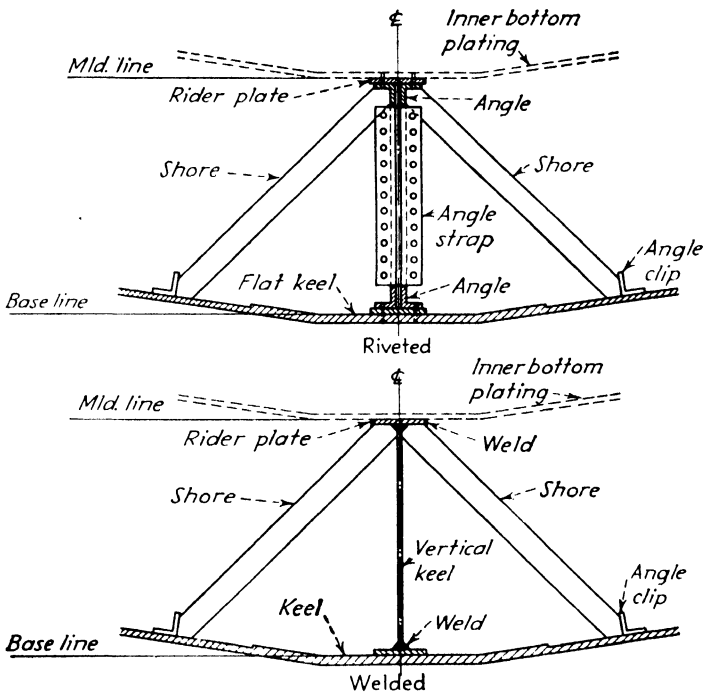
All riveted and combination riveted and welded center vertical keel connections.
